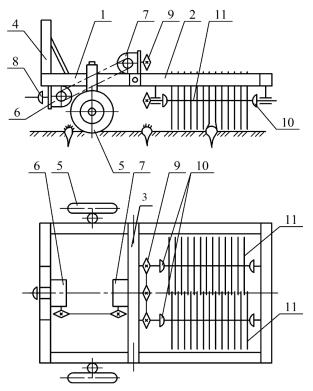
Structural and technological scheme of the experimental machine: 1– main frame; 2 – turning frame; 3 – turning beam; 4 – hitch; 5 – gauge wheels; 6 – gear; 7 – gearbox; 8 – cardan; 9 – through chain; 10 – cardan transmissions; 11 – blades
